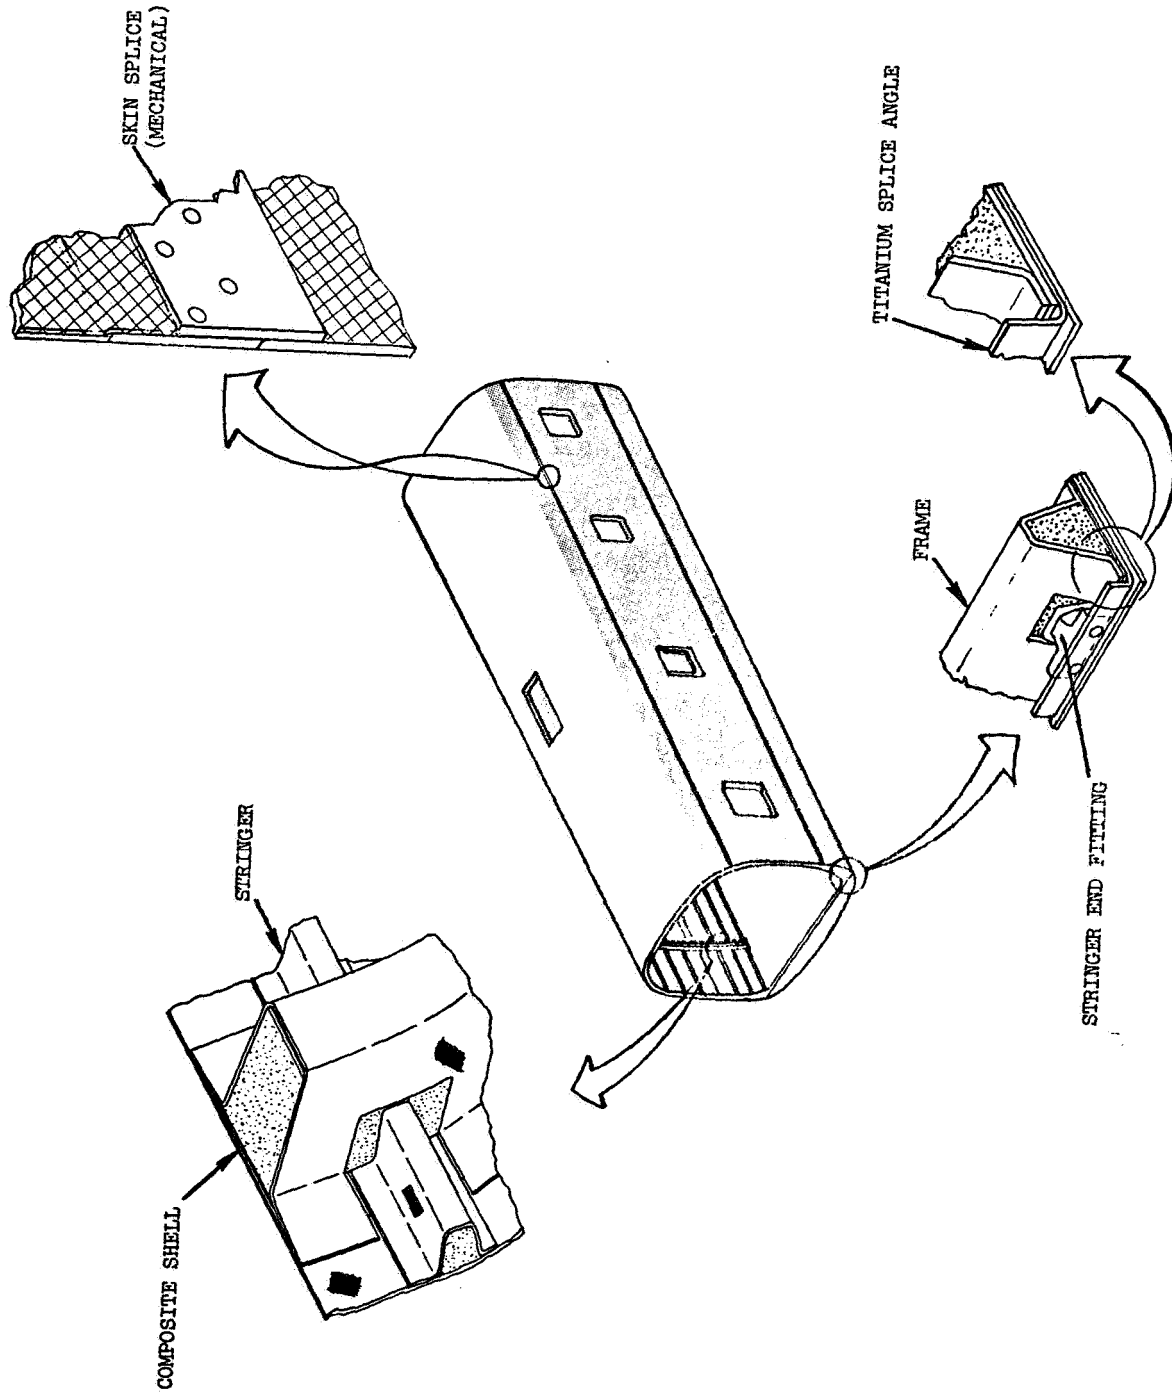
COMPOSITE CABIN SECTION, ASSEMBLY DETAILS.
